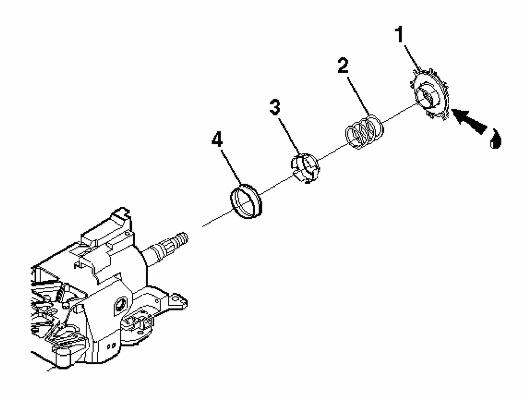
View of Inner Race, Upper Bearing Inner Race Seat, Upper Bearing Spring & Turn Signal Cancel Cam Assembly Courtesy of GENERAL MOTORS CORP.
